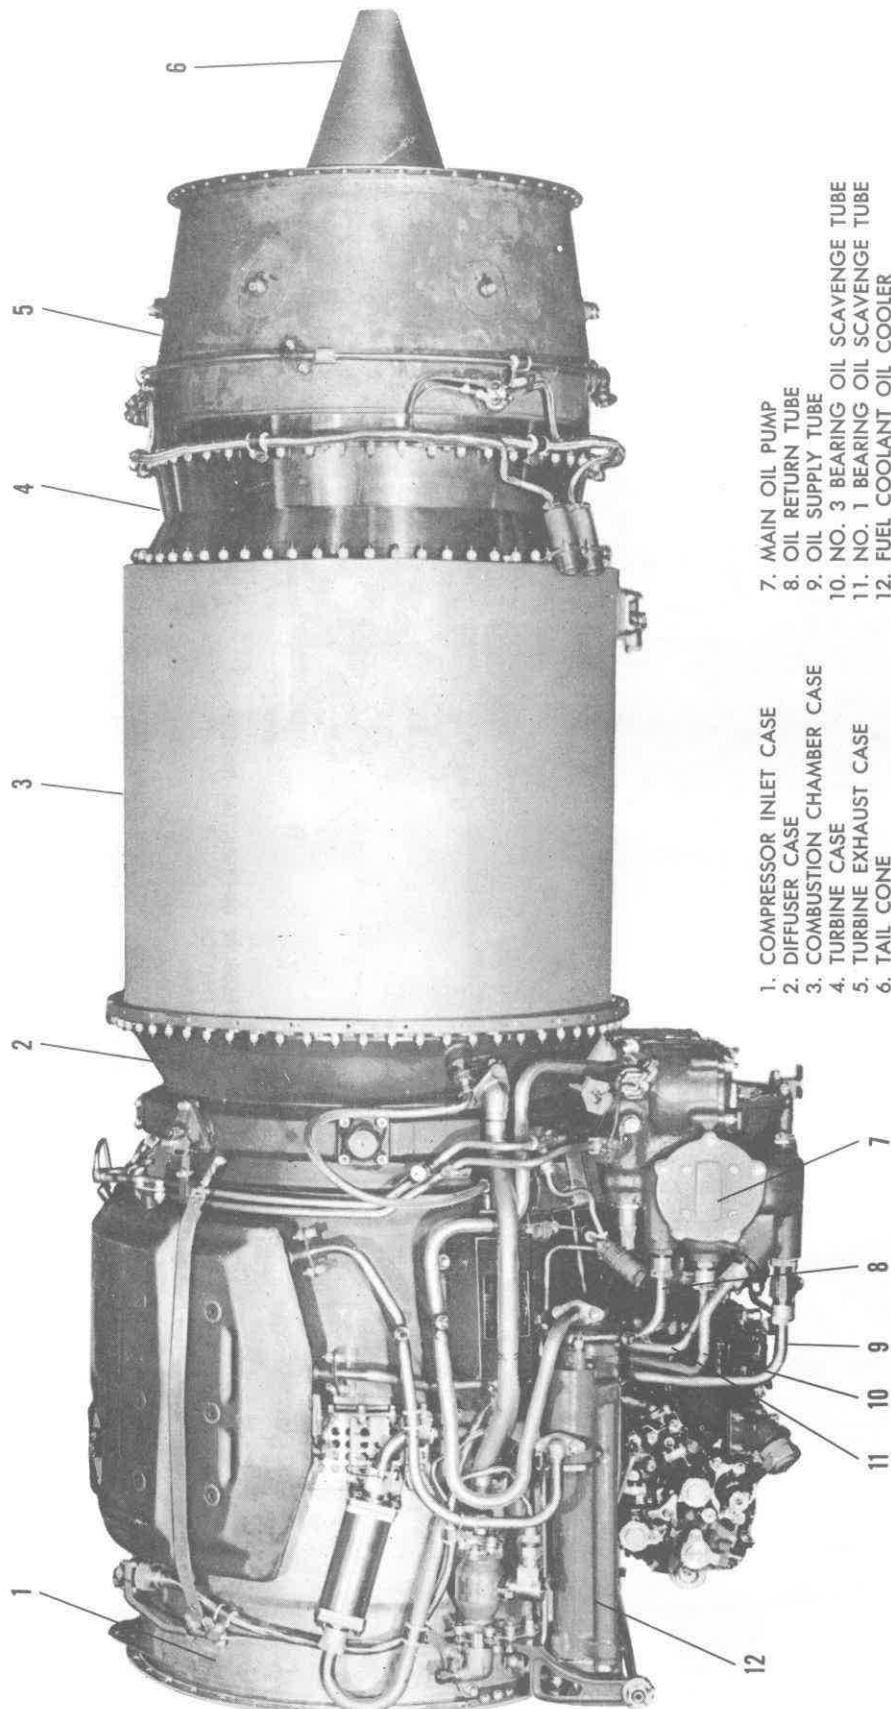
Left Side View of Engine (JT12A-6A[N] and JT12A-8[N])
